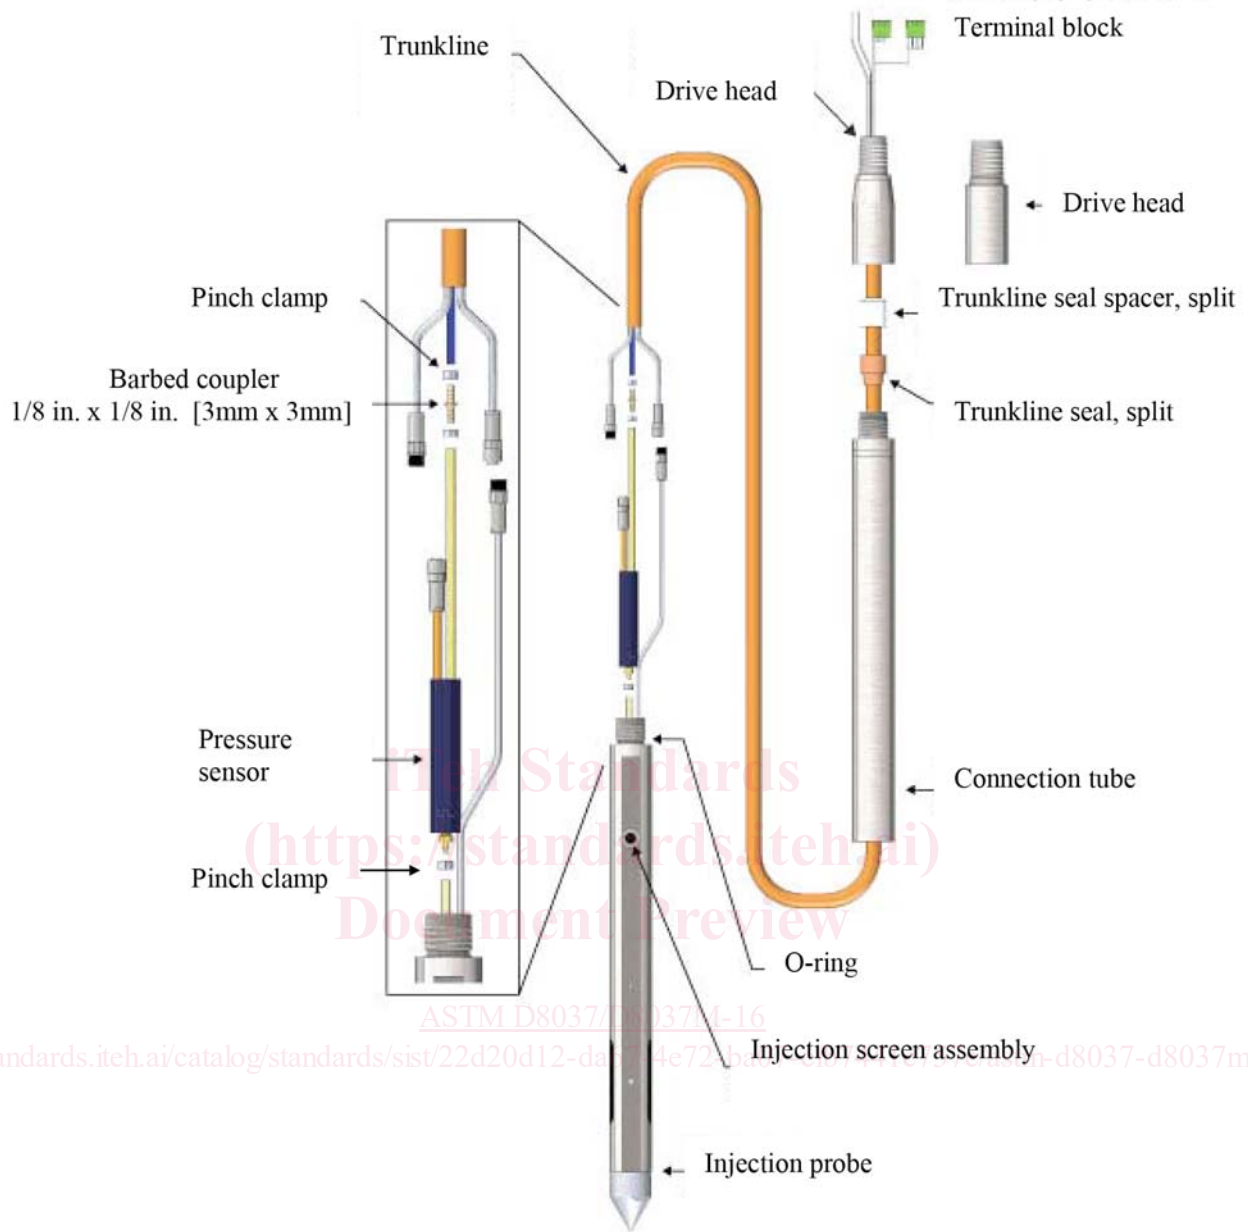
Assembly of an Injection Logging Probe and Attachment to the Trunkline
